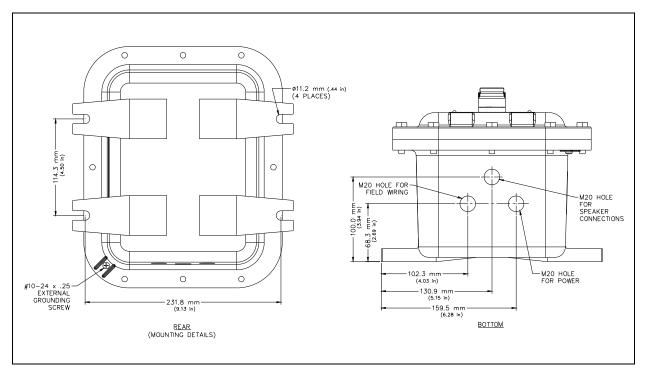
Model 400-003/400-004 Mounting Details and Entries
